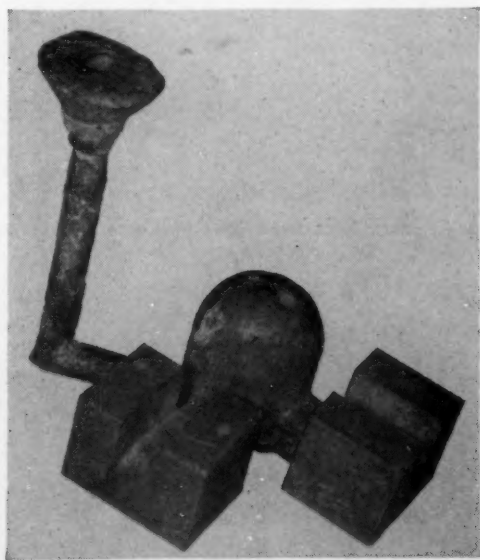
METHOD OF MAKING KEEL BLOCK CASTING WITH A BLIND RISER.
